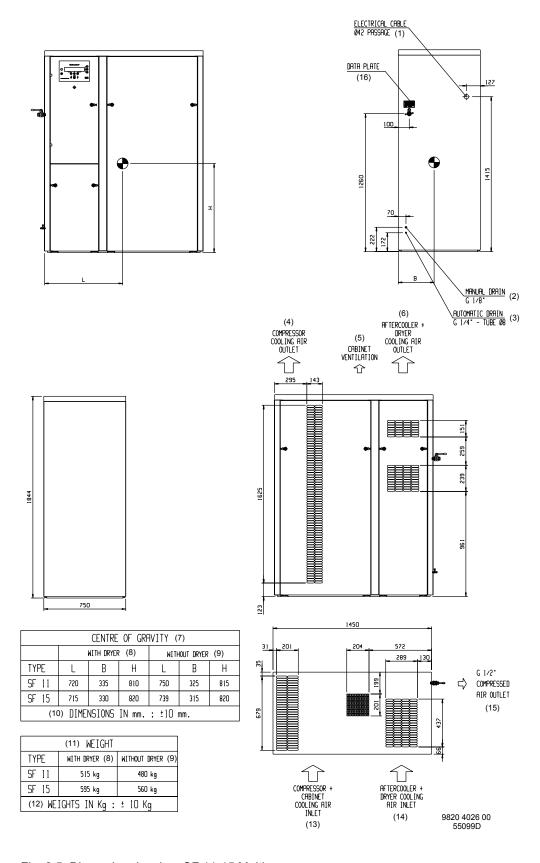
Dimension drawing, SF 11-15 Multi
